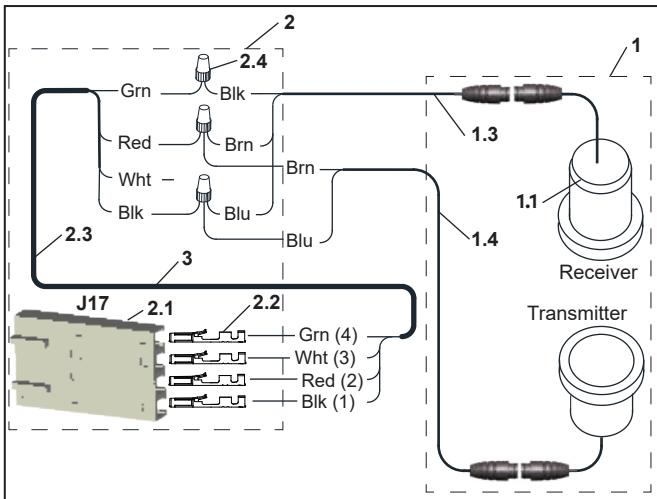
J18 Cable assembly, safety edge sensor, interior
